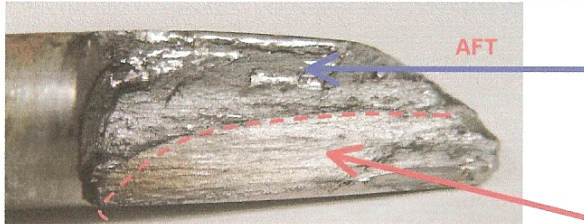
Drive shaft fracture, AFT end (digital)
